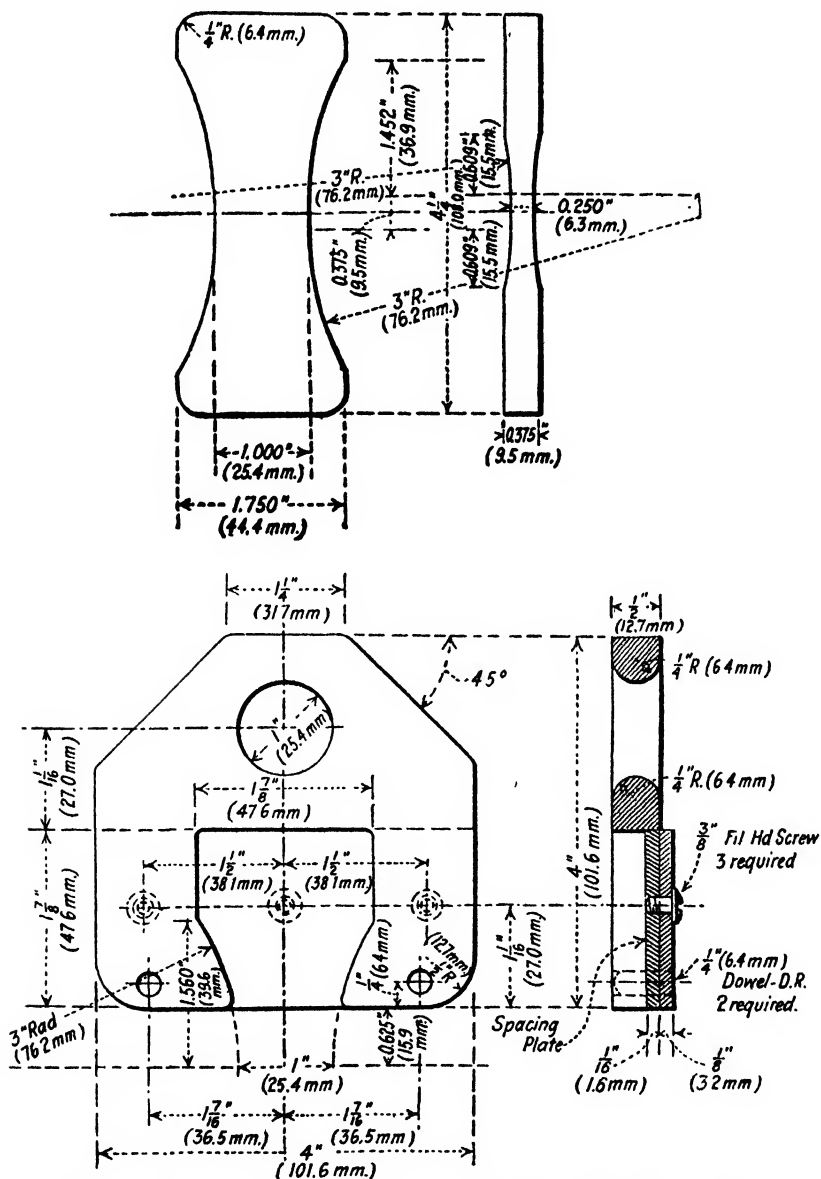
Tension Test Specimen and Holder for Molded Materials.
